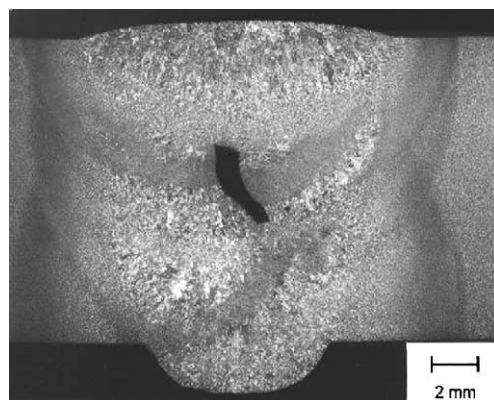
Intentional lack of fusion defect in 14 mm thick Eurofer weld (macrography).
